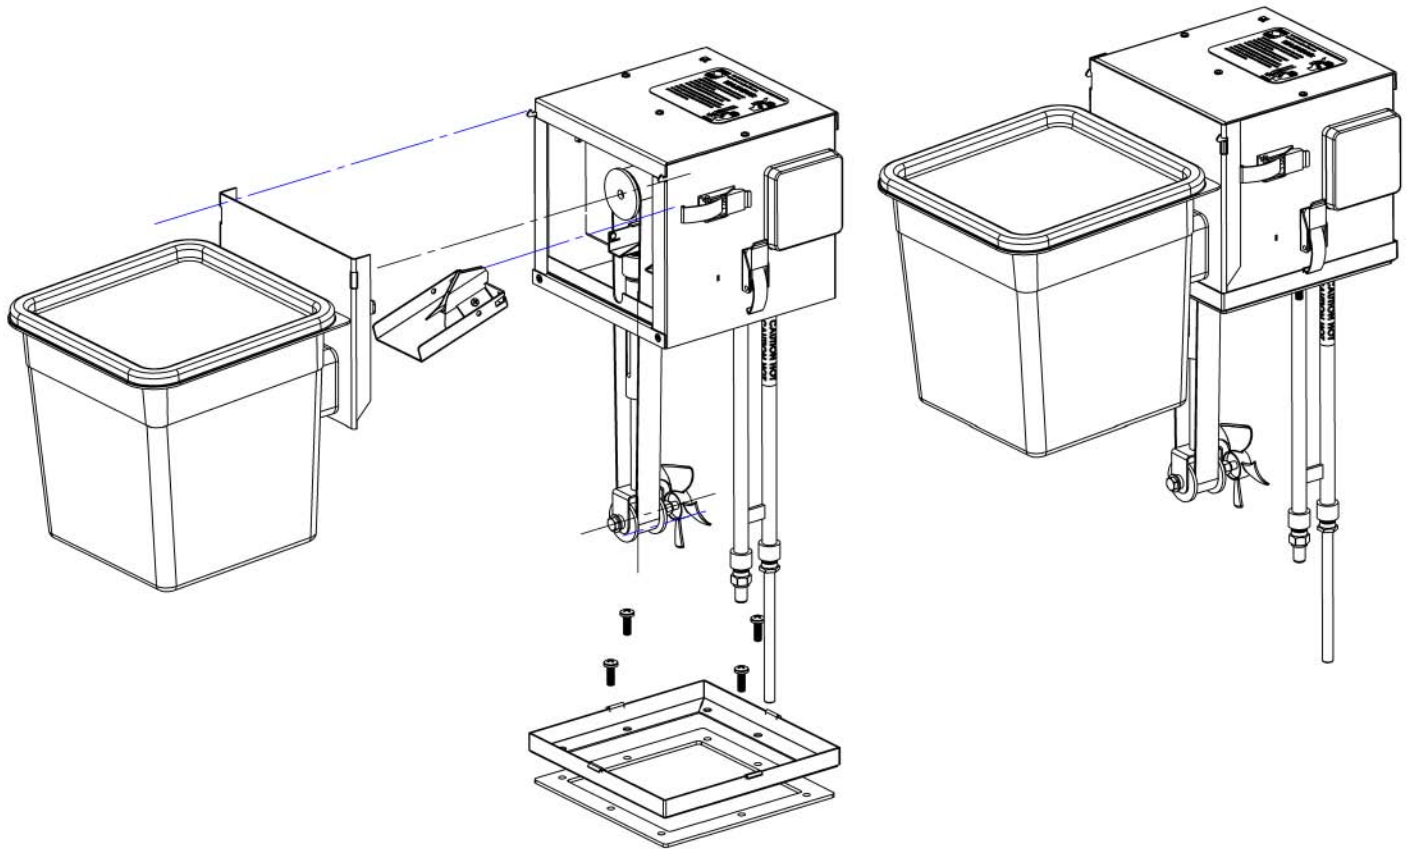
CUSTOMER ASSEMBLY AFTER SHIPMENT
